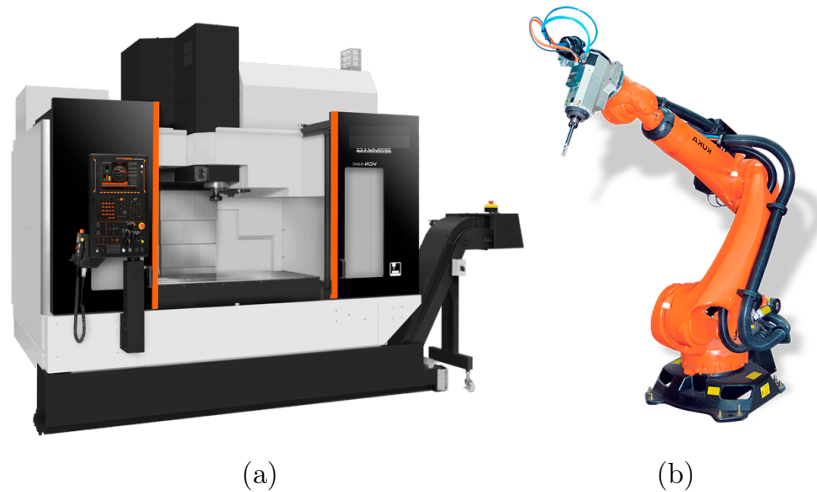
(a) A conventional CNC machine tool [1] and (b) a robotic machining system [2].
